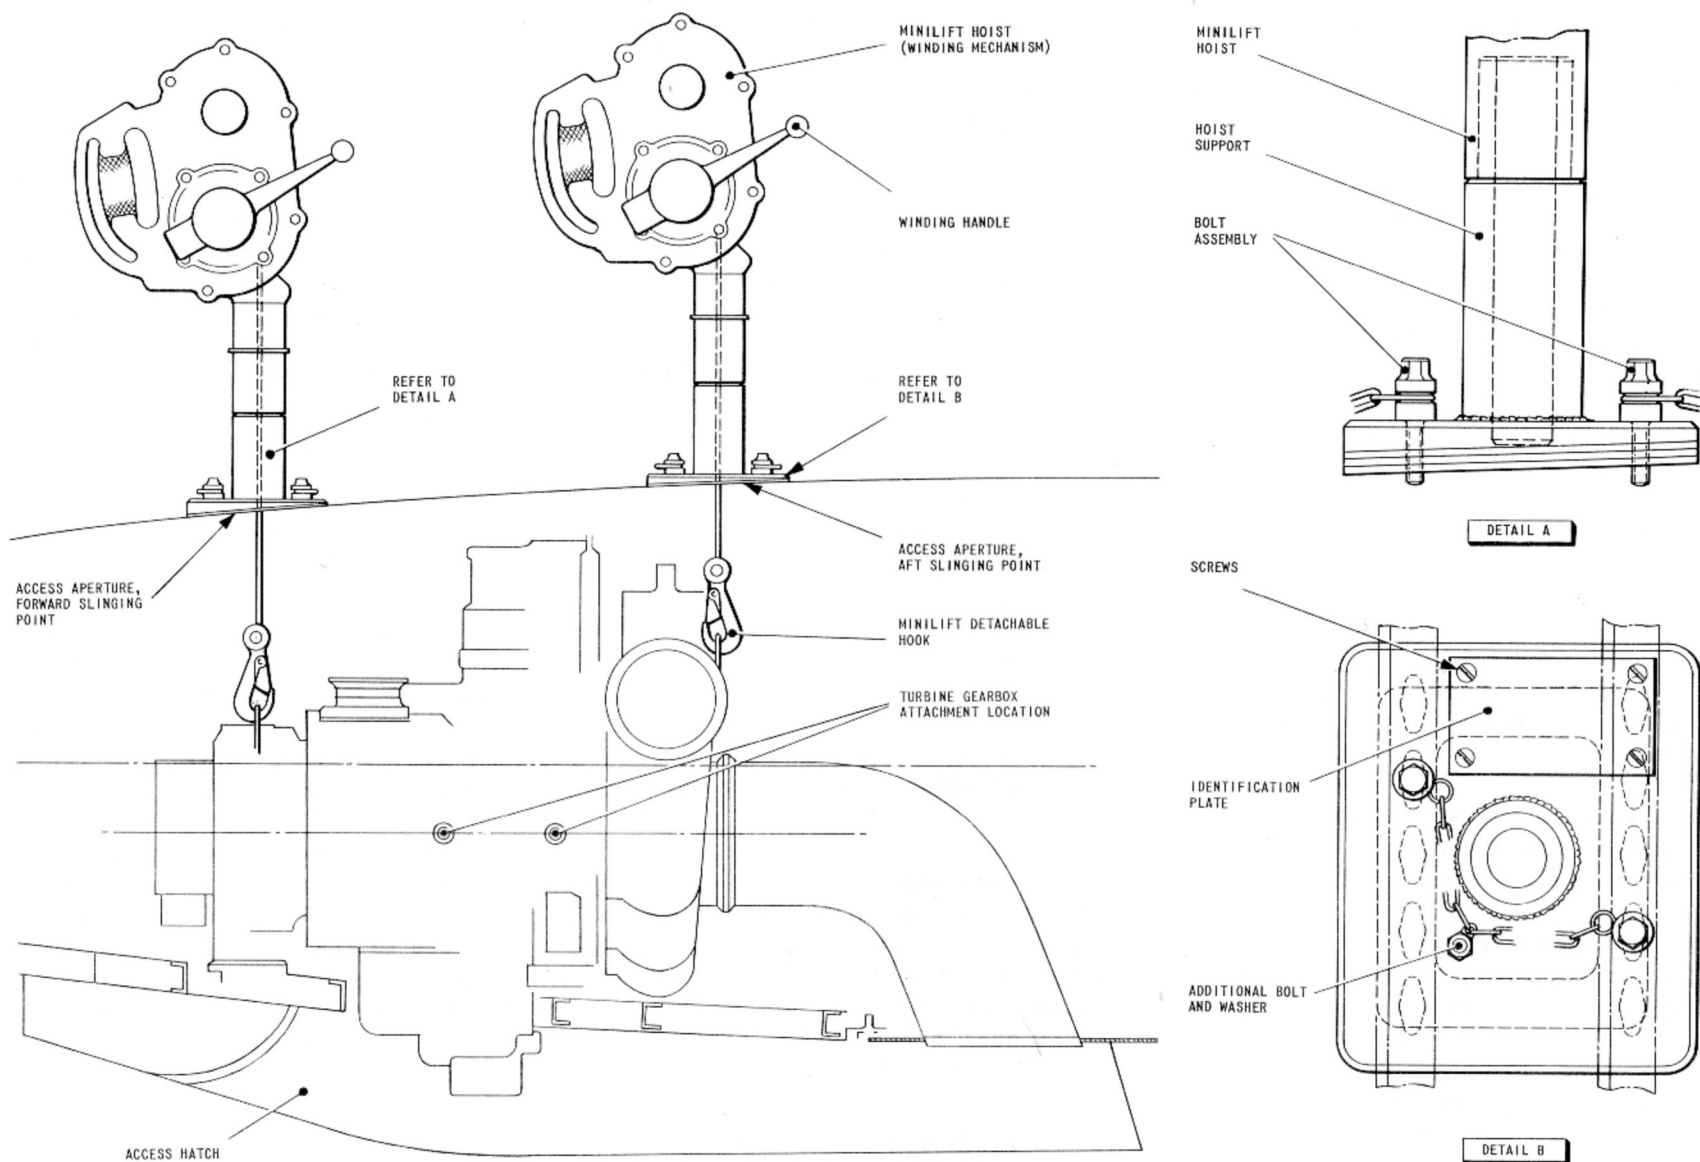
TURBINE - GEARED ALTERNATOR - REMOVAL AND ASSEMBLY (3)
